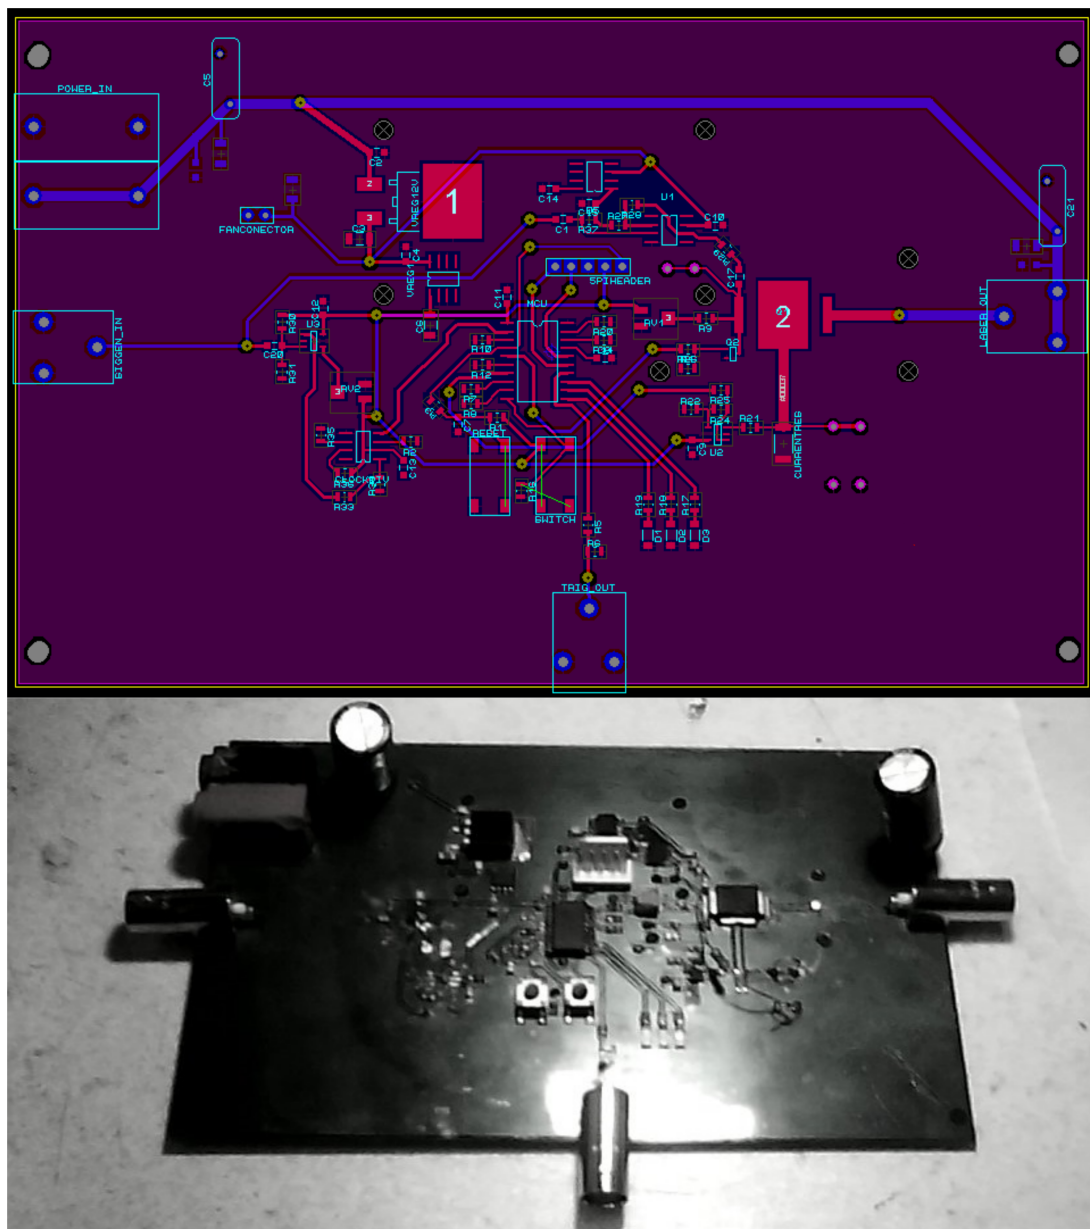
a: Photomask of Board Layout. b: Photograph of manufactured board.
